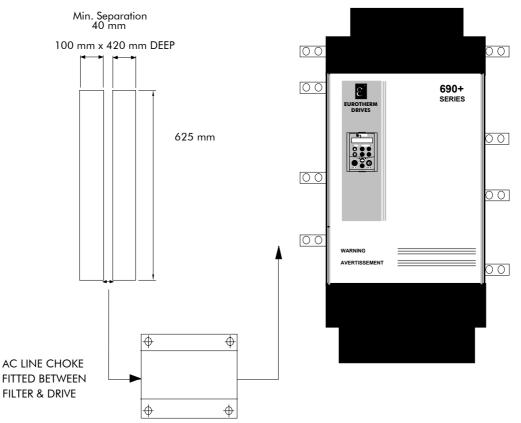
Filter Mounting Details Using 2 off Part No. CO467843U340 for Type G, H & J
